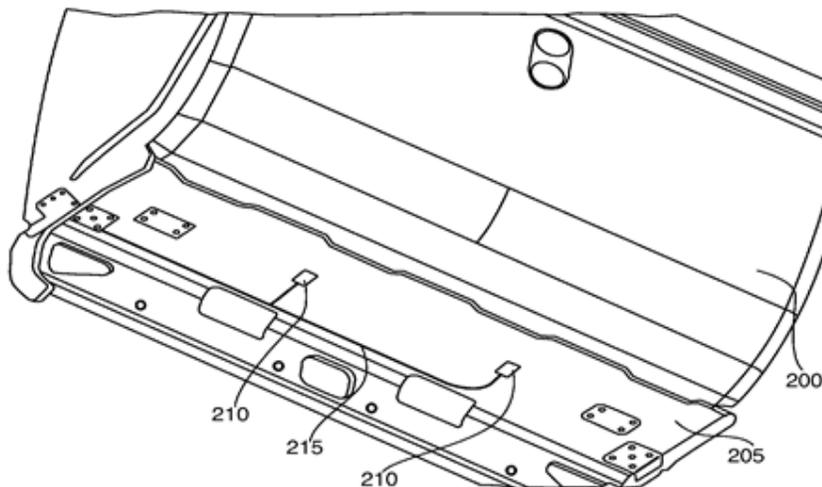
diagram showing load sensors positioned on a bottom surface
